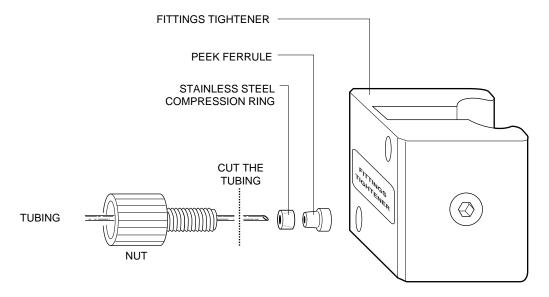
Making 1/4-28 Flat Bottom Fittings
